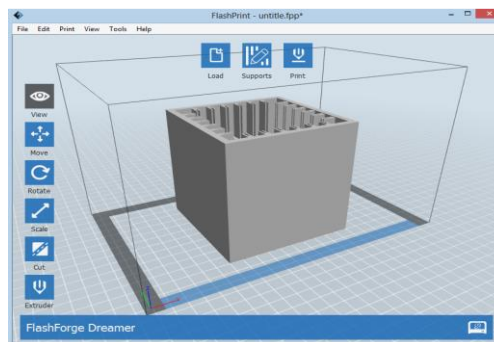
3D Design of Acoustic Enclosure Printing Setup
